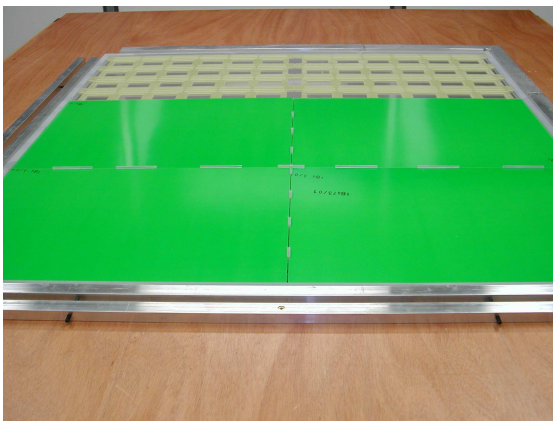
Photograph of the mechanical square meter prototype under assembly.
